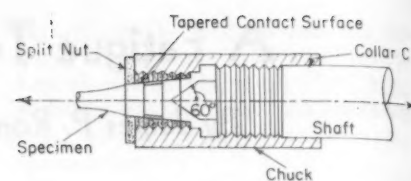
Section View of Connections of Specimens, Chuck, and Shaft.
